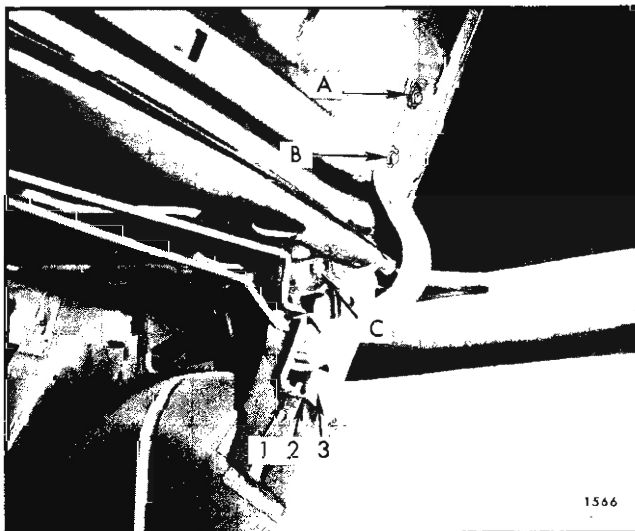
F8—Rear Compartment Lid Hinge and Torque Rod Attachment
